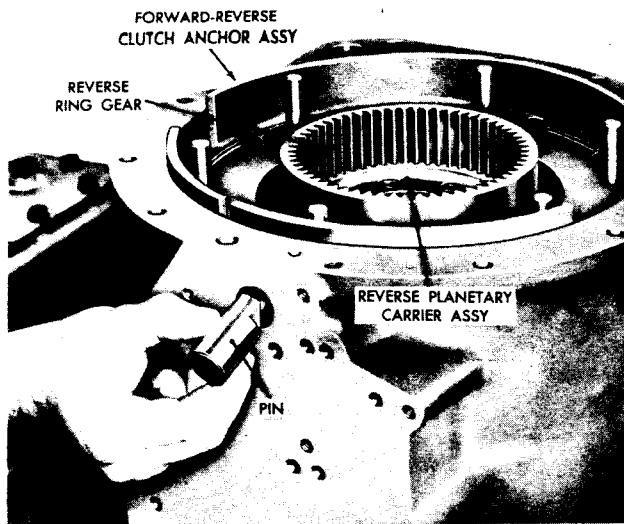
Installing (or removing) forward-reverse clutch anchor pin
